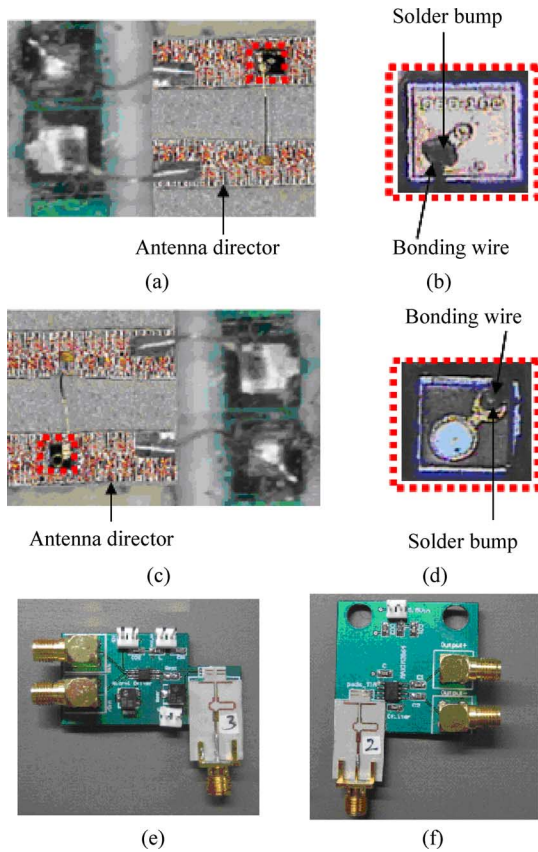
Photo of the RF/FSO transceivers: (a) Packaging of VCSEL to transmitter board. (b) Bonding wire on VCSEL. (c) Packaging of PIN to transmitter board. (d) Bonding wire on PIN. (e) RF/opto transmitter board and (f) RF/opto receiver board.
